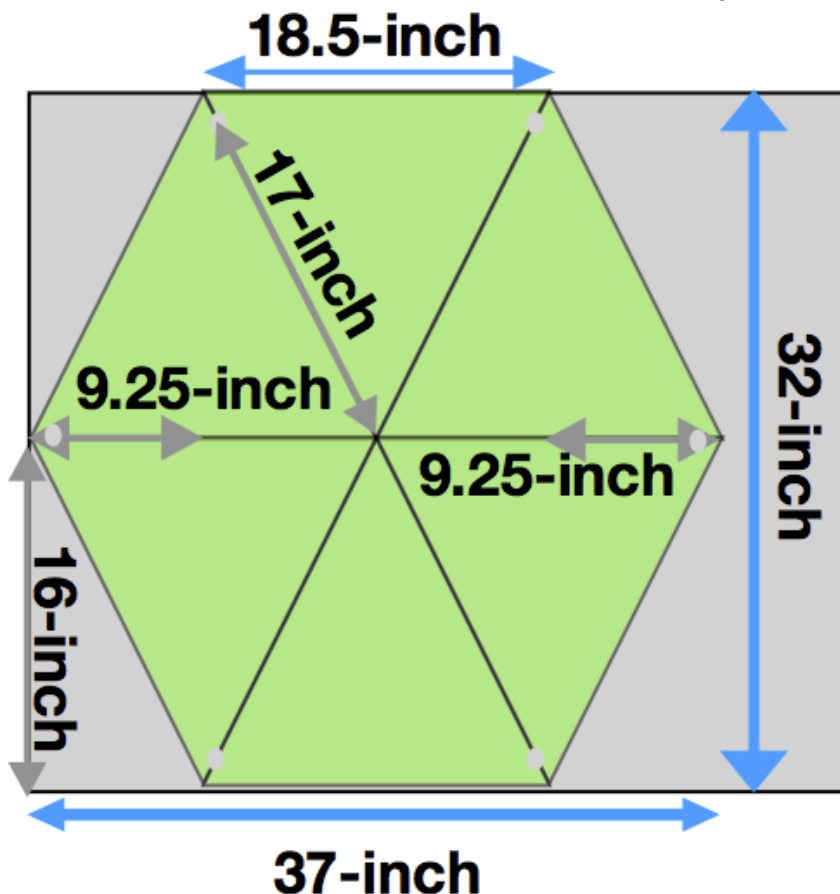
Cone Lid Construction guide for creating a large foam hexagon. The part is created from 1/3 of a 8 ft sheet of 3/4 inch thick foam insulation. The largest dimension is 37 inches and the hexagon is 32 inches wide in three directions. The support legs feed through 6 holes on the edge of the hexagon. The holes are 1-inch in diameter, 17-inch from the center of the hexagon.
